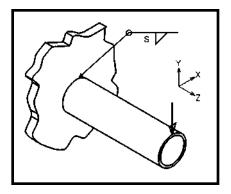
Pipe T-joint welded on one side, loaded in bending.
